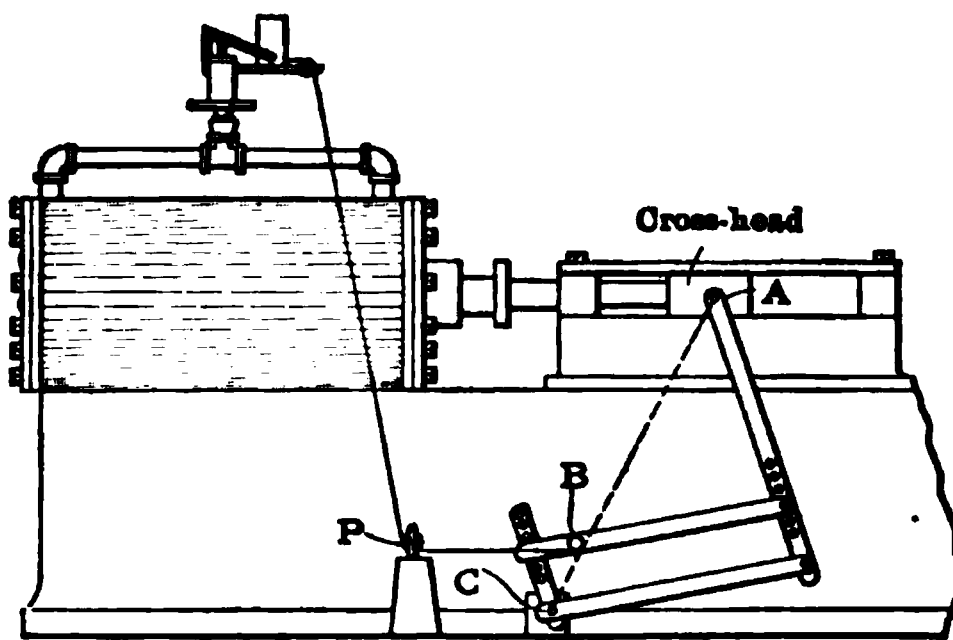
Simple Parallel Reducing Motion as Attached to a Steam Engine.
